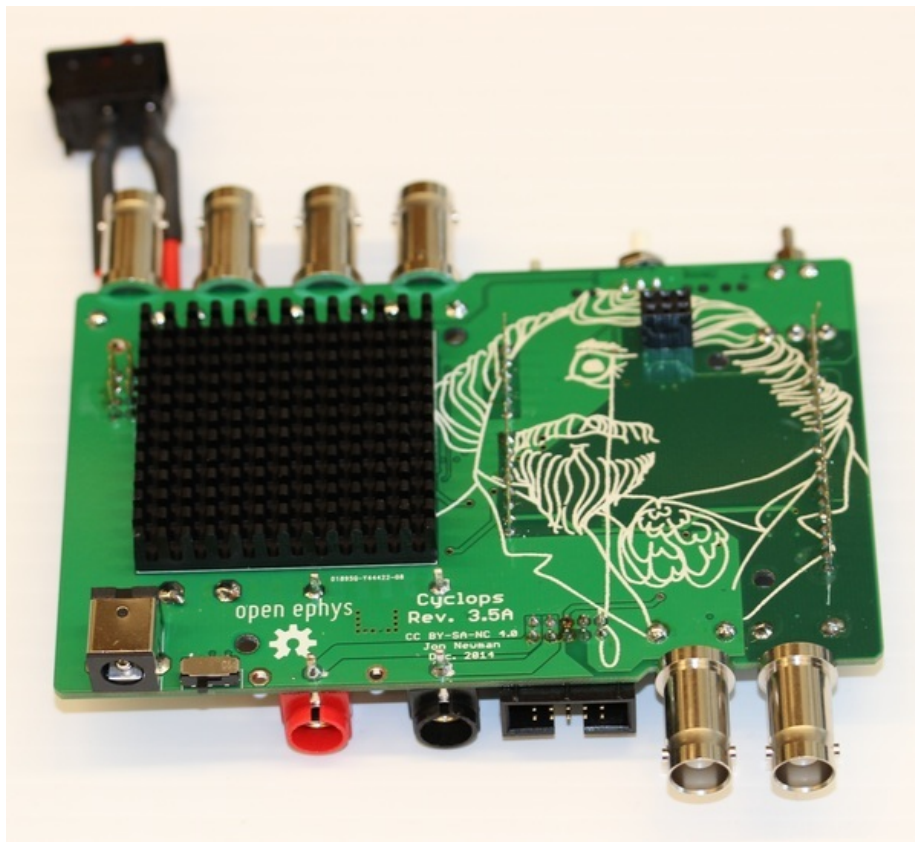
Bottom of board with adhesive-backed heatsink in place.
